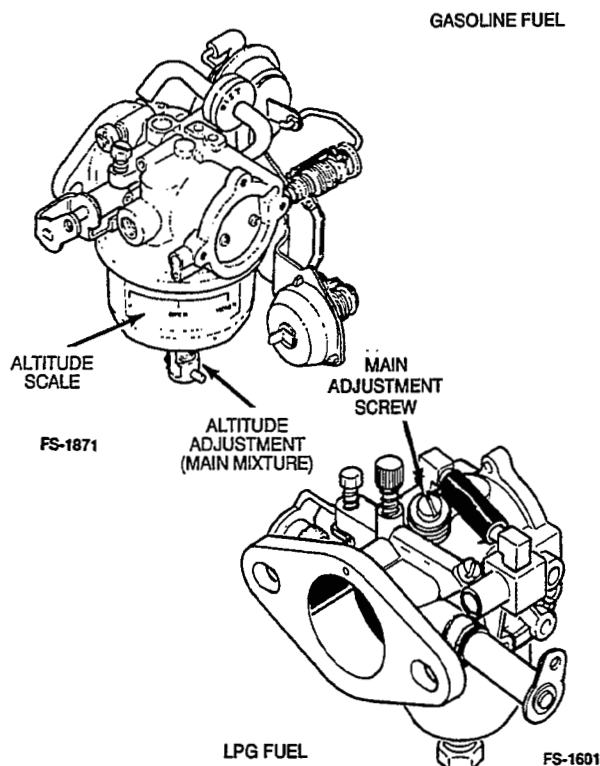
CARBURETOR MAIN ADJUSTMENT SCREW
